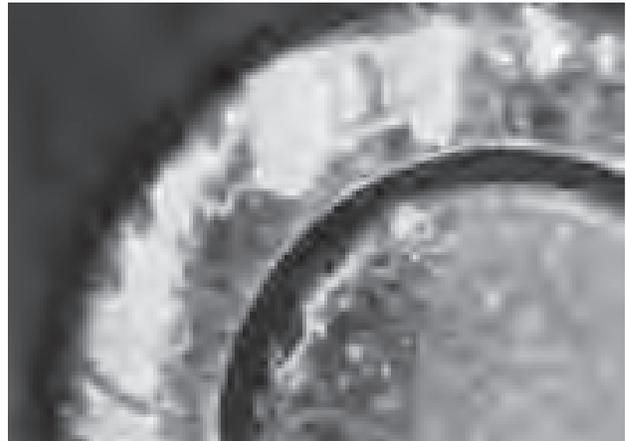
Scratches on Larger Side Surface of Tapered Roller Bearing
